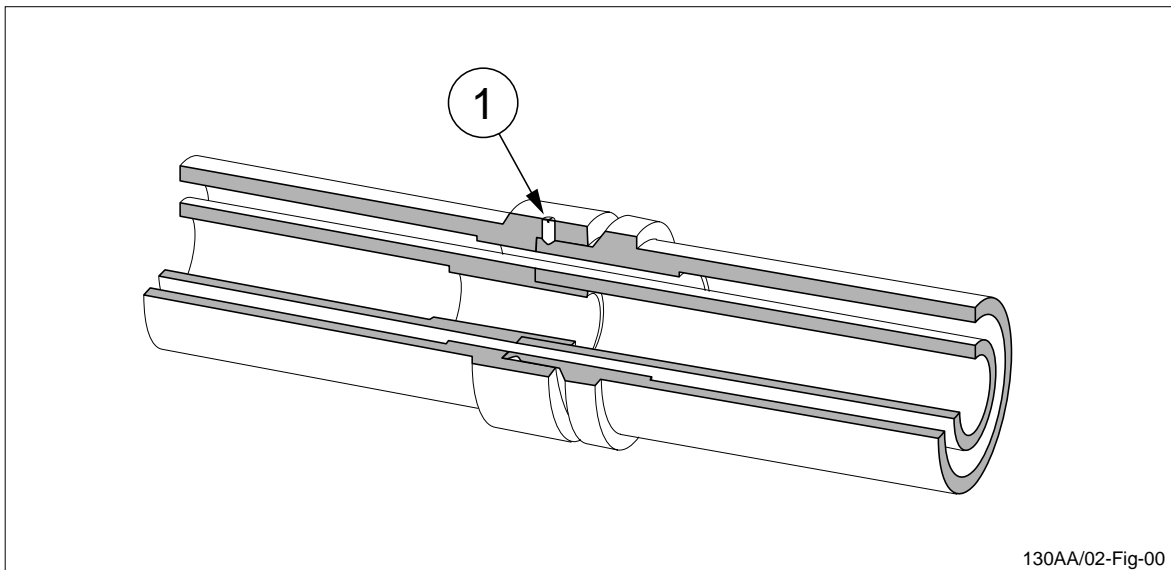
The twin tube joint is screwed together and locked into position by a set screw.
